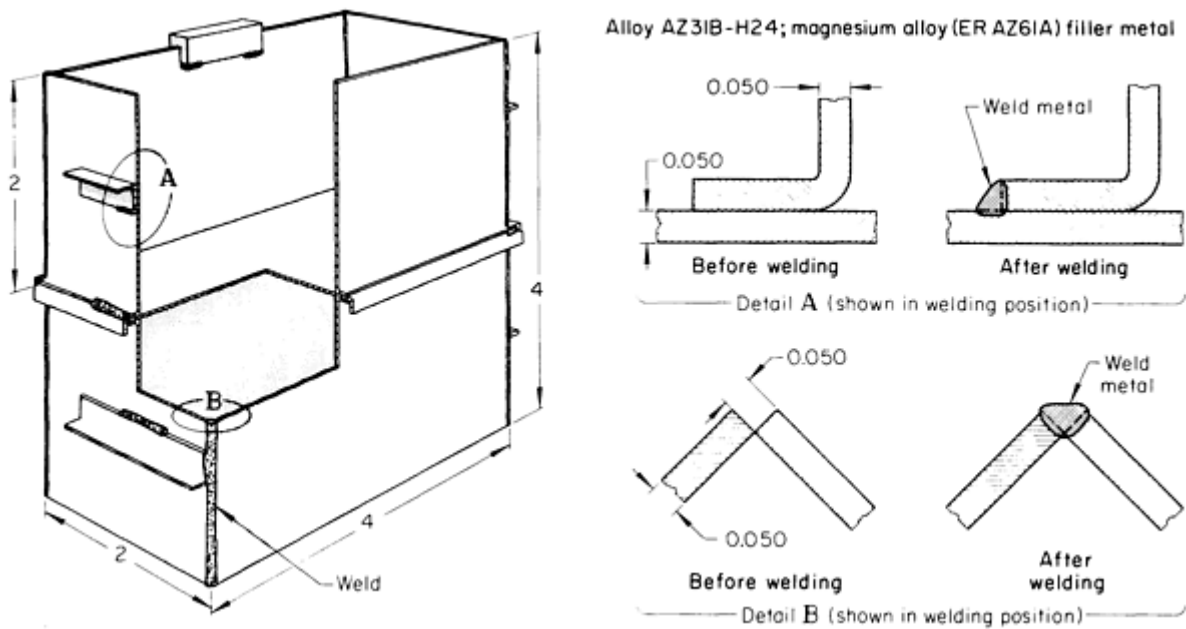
TECHNIQUES TO PREVENT CRACKING OF WELD WHEN JOINING MAGNESIUM ALLOY PLATES
